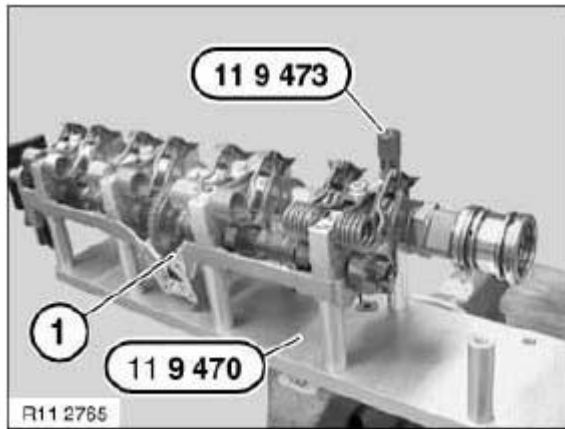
Identifying Special Tools (11 9 473) And (11 9 470)
